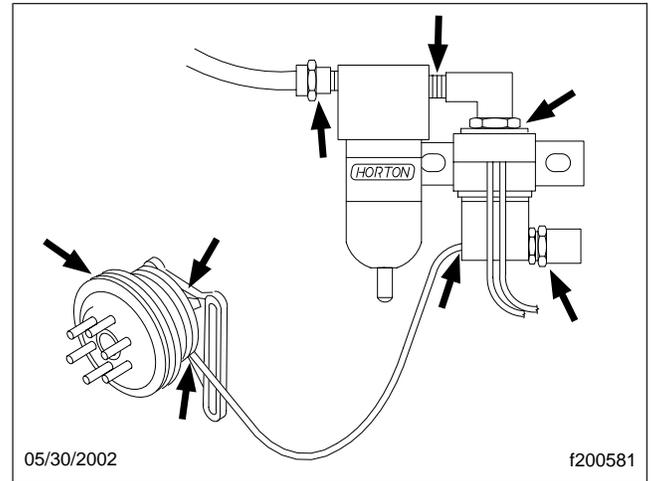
, Checking for Air Leaks (Horton DriveMaster)
